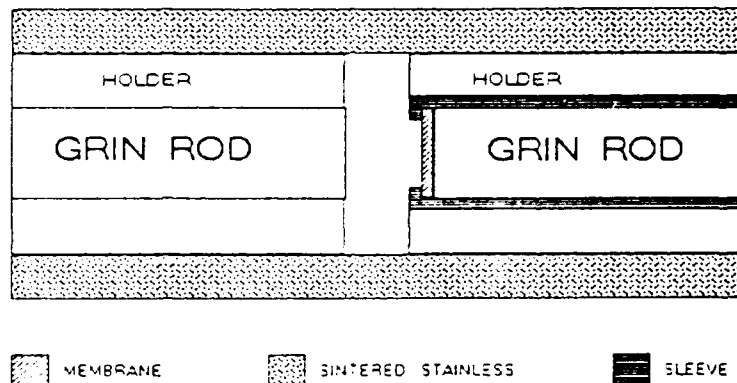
The sensor consists of two GRIN rods mounted on 200um fiber optic cable held within a sintered stainless steel tube by a pair of aluminum holders. The membrane is held in place by a sleeve over one of the rods.
